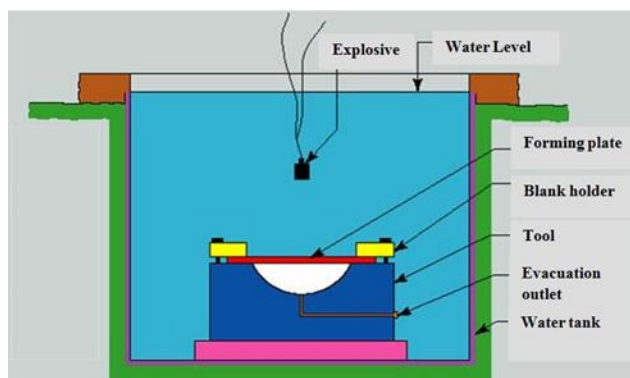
Schematic diagram of a stand-off explosive forming [23]
